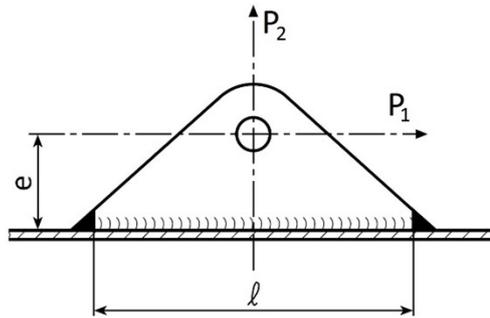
Weld joint of a vertically mounted lifting eye
